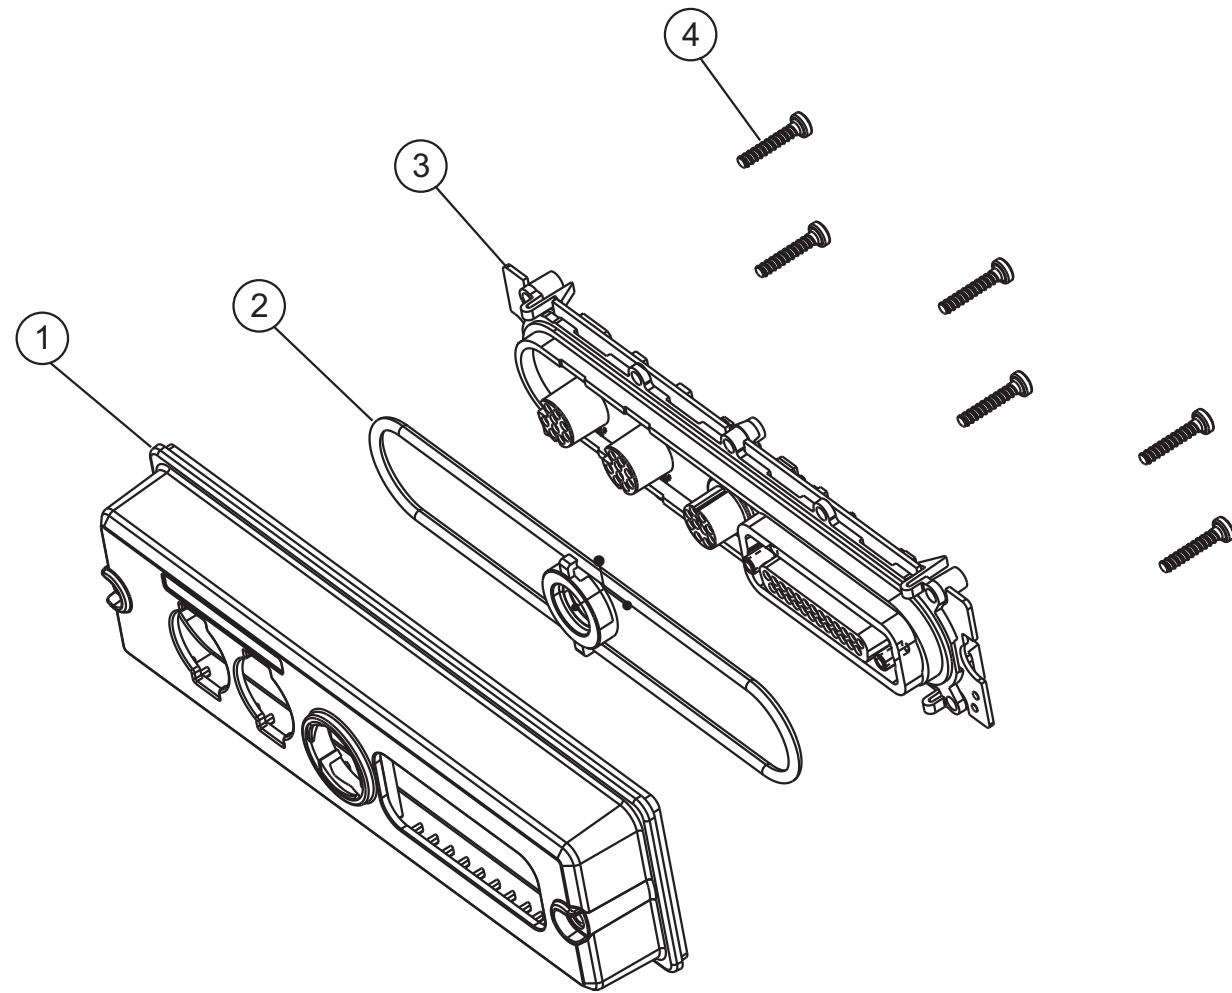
Transceiver Interface Board (TIB) Exploded View
